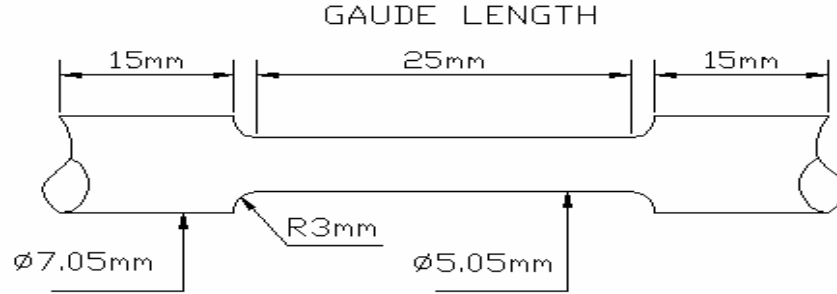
Tensile test specimen (ASTM-E8, 1975)
